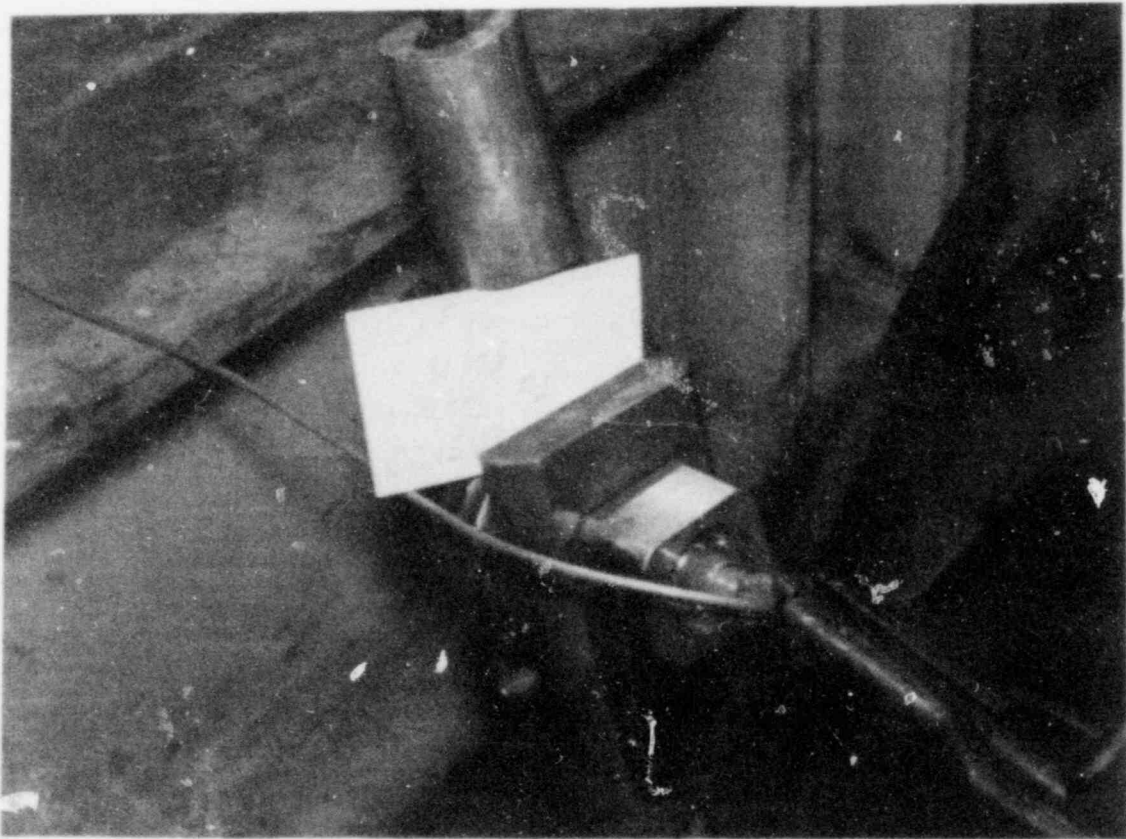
Instrumented Clevis Bolt Placement at Far End of Hallum Cask Skid - Tests 12 and 13
